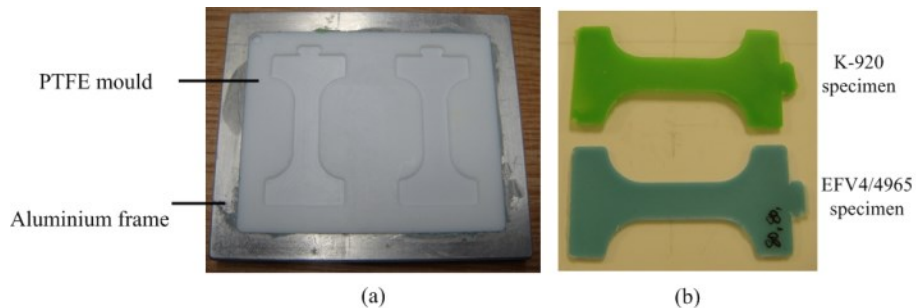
(a) A photograph of the PTFE mould and (b) casted samples.
